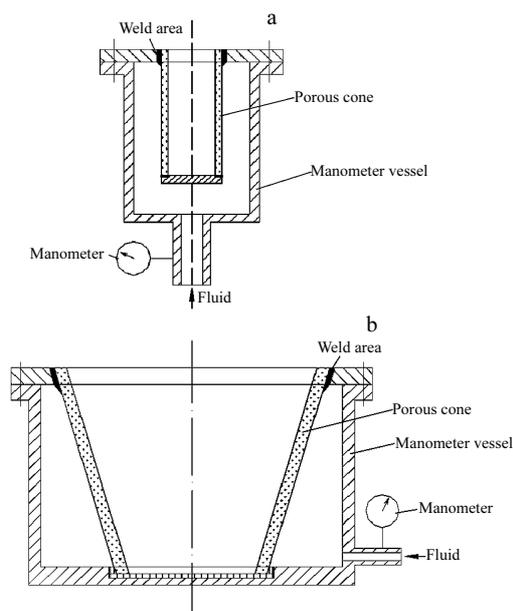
Schematic of breaking pressure test: (a) for tube; (b) for cone with overall dimension
